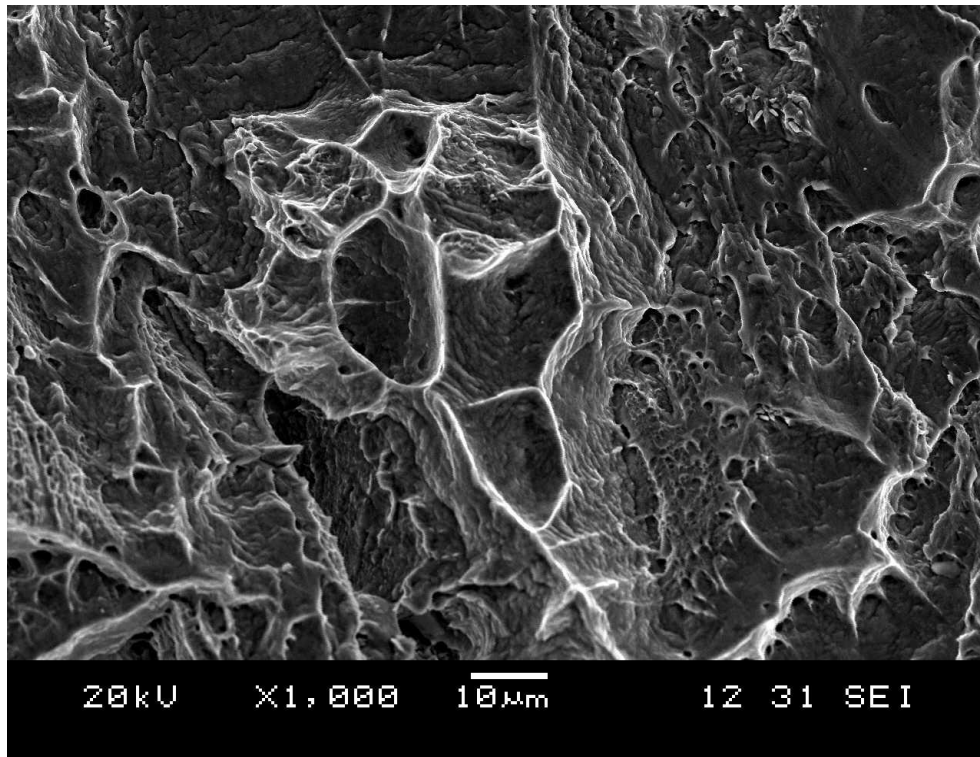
Fatigue fracture surface of C22 in air
